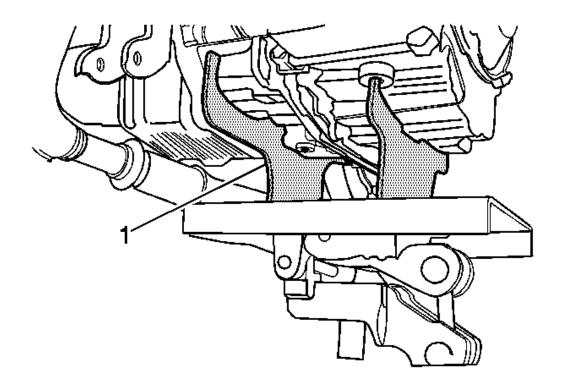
1-2-3-4 and 3-5 Reverse Clutch Assembly and 4-5-6 Clutch Assembly Removal Courtesy of GENERAL MOTORS CORP.
